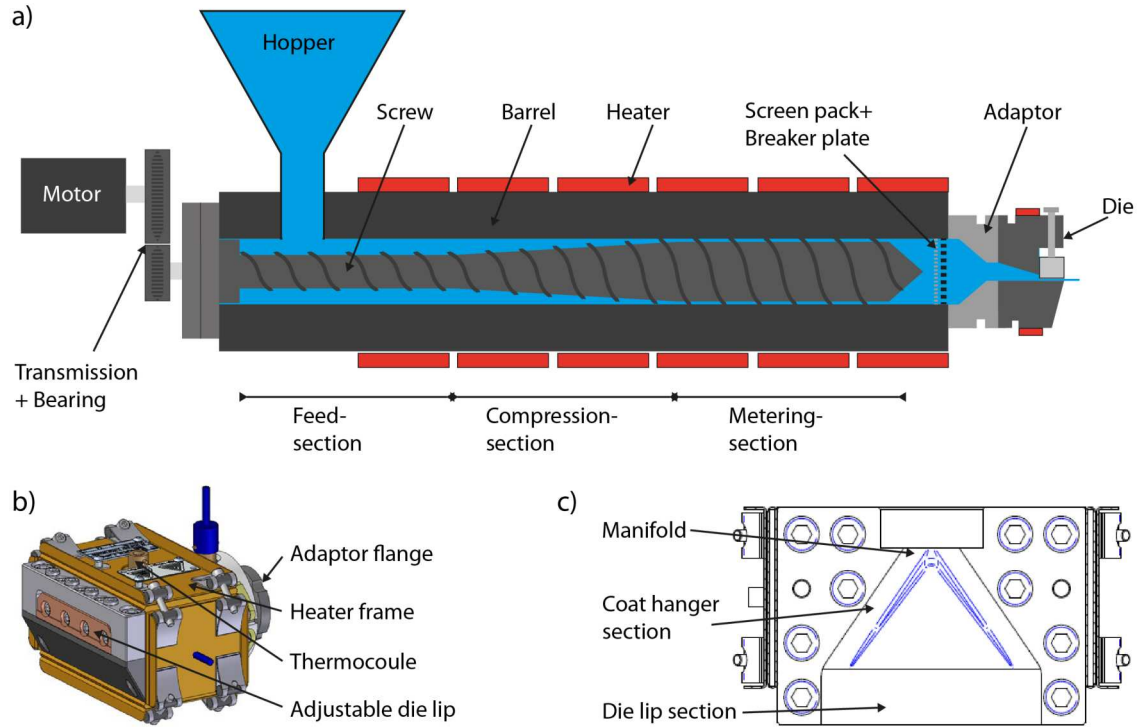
a) Schematic of a typical extruder. b) The cast film die used in this thesis. c) Cut through the cast film die. The coat hanger design is clearly visible. Images b) and c) reproduced from the Collin manual of the cast film die (Collin BSD 120).
